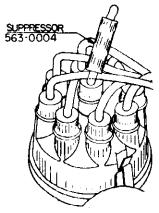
DISTRIBUTOR SUPPRESSOR 563-0004
